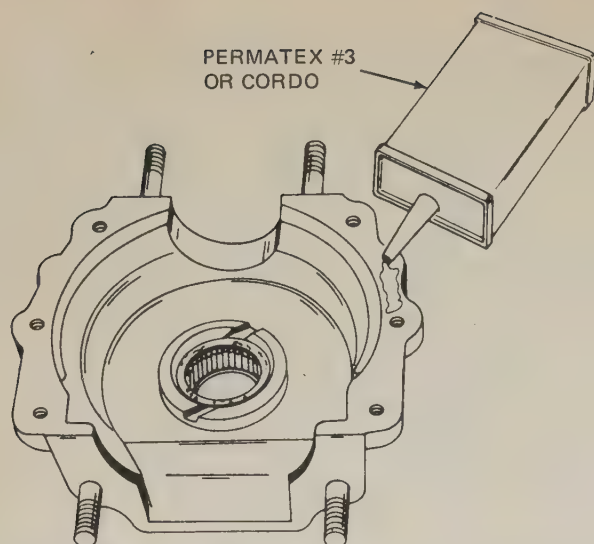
Applying sealant to the contact face of one half of the split crankcase. (Tecumseh Products Company)
